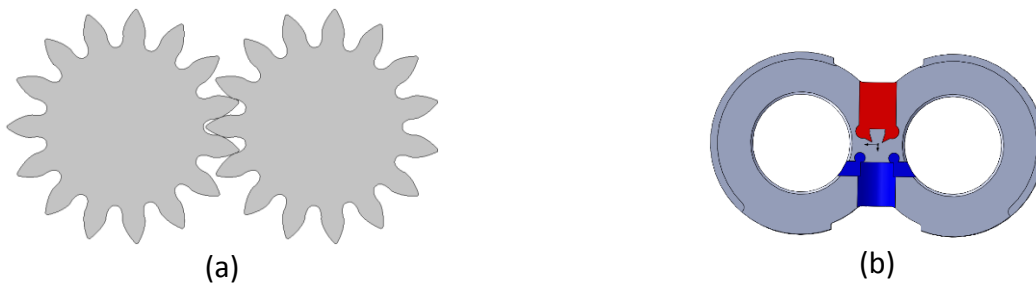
(a) - Optimized Asymmetric gears. (b) Optimized groove shape design
